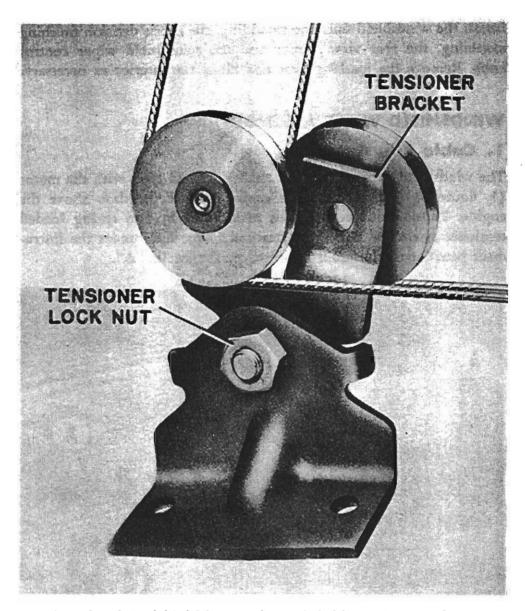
Windshield Wiper Control Cable Spring Loaded Tensioner.
